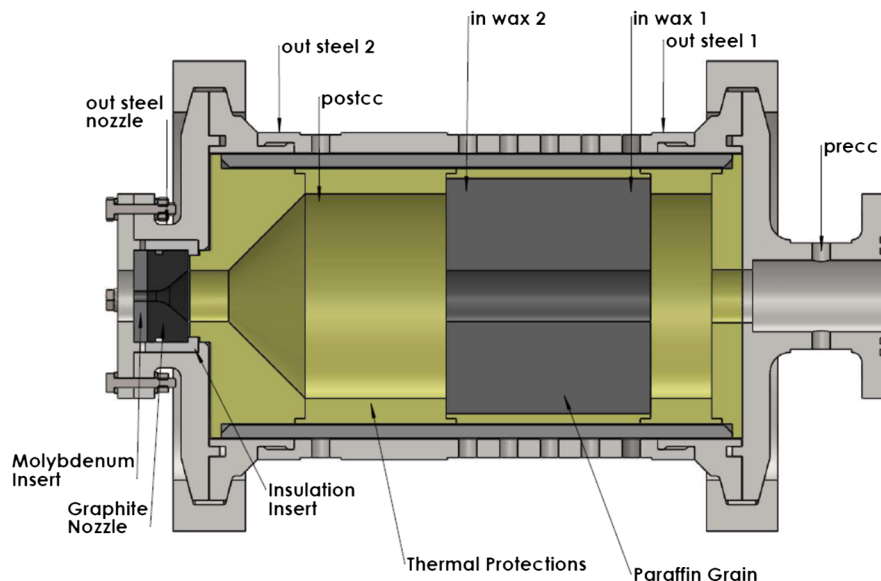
Hybrid motor configuration for the long-burn test (80 s): on the upper side, the sensor positions; and on the lower side, the key motor elements definition.
